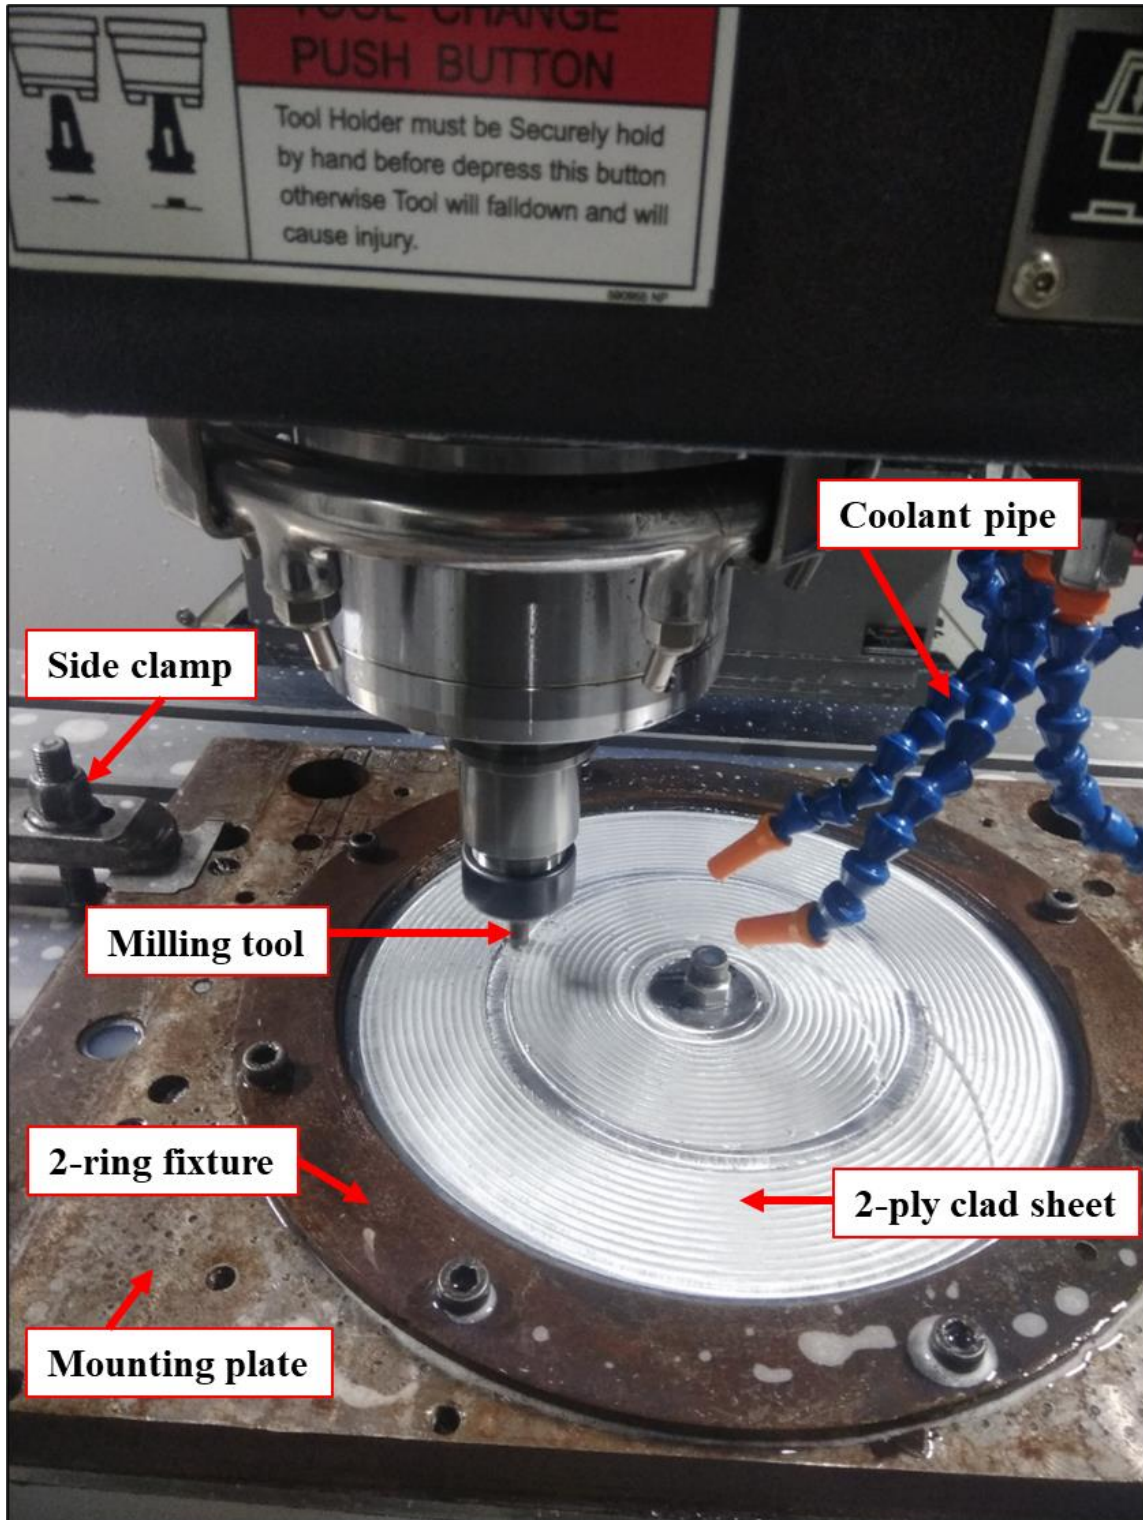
Experimental setup used for removal of SS430 from 2-ply clad sheet
